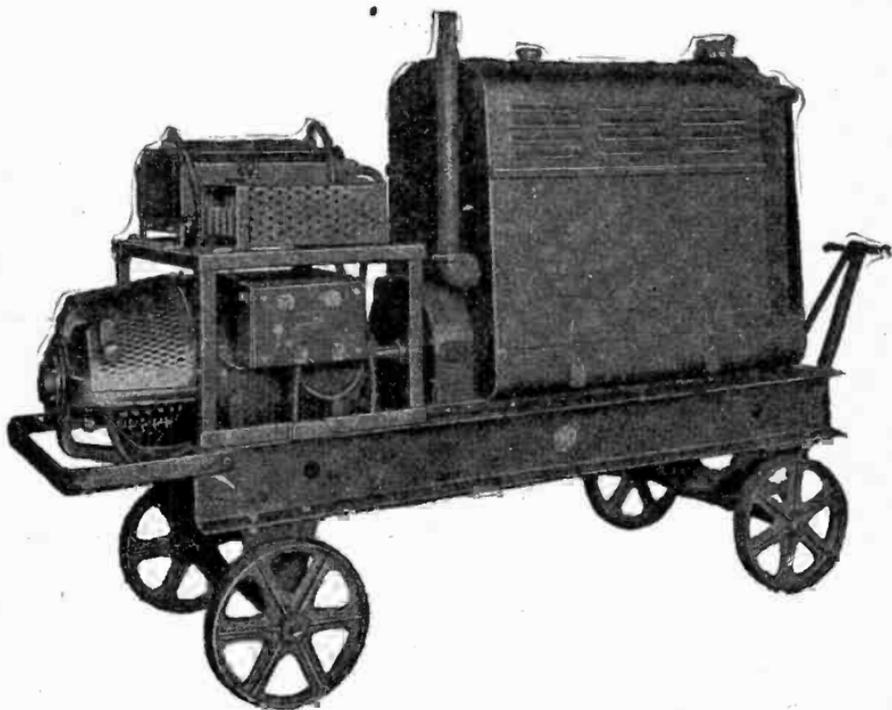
,980.—General Electric portable gas engine driven arc welder. The dynamo is self-excited. A self-adjusting stabilizing reactor automatically steadies the arc under all welding conditions, making the arc easy to start and maintain.
